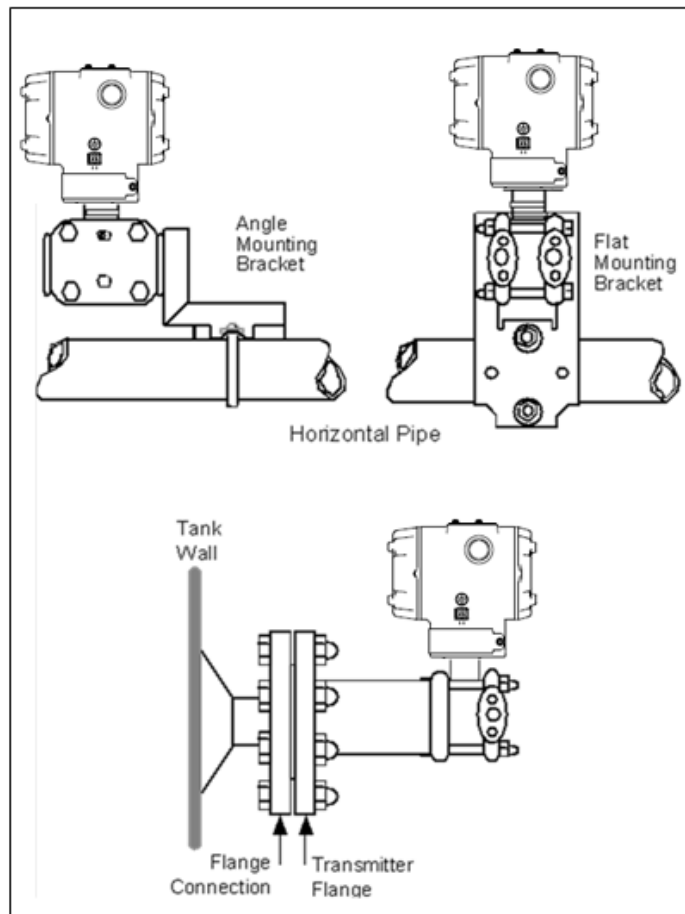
Typical Bracket Mounted and Flange Mounted Installations
